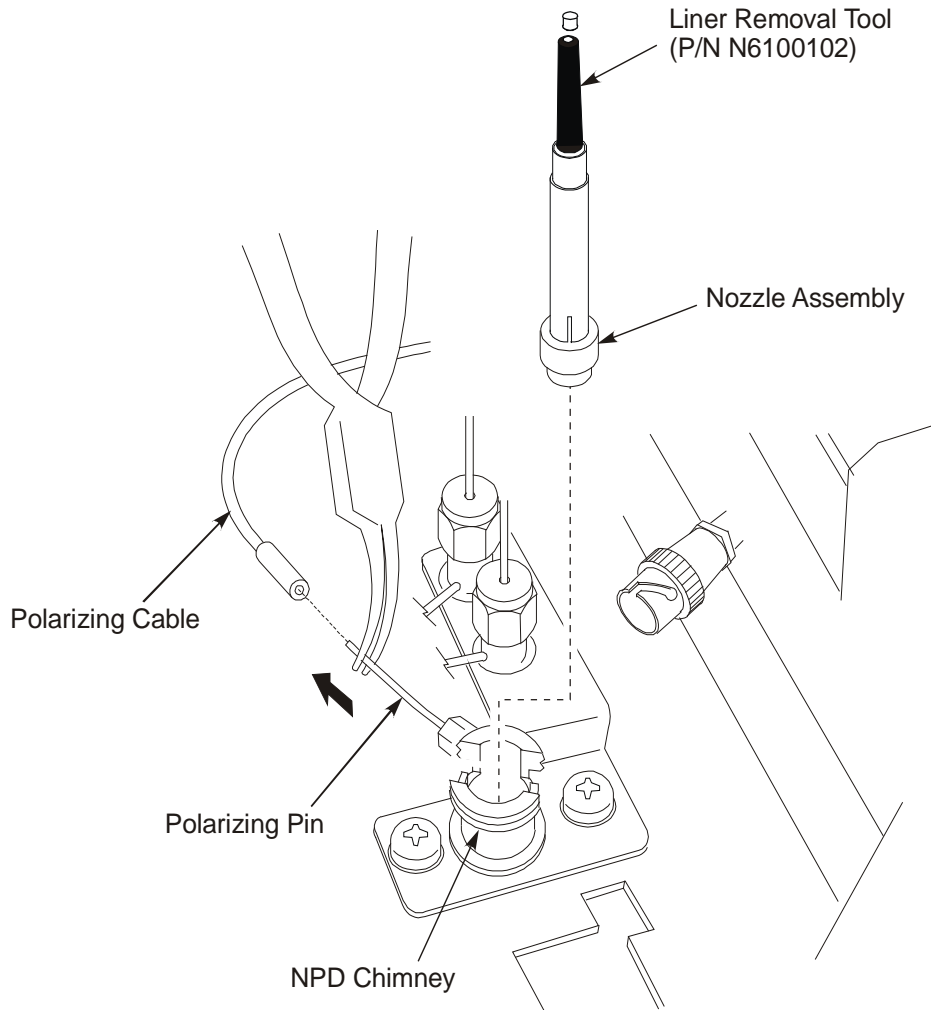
Removing the NPD nozzle assembly and polarizing wire.
